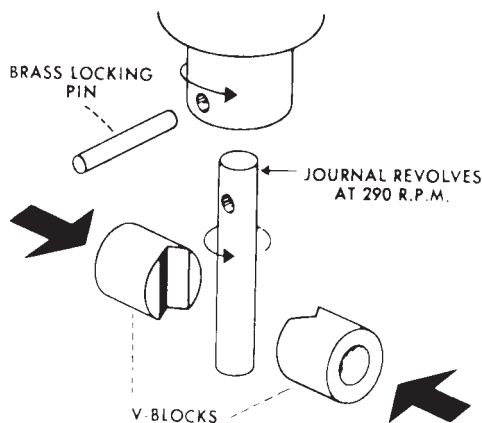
Exploded View of V-Blocks and Journal Arrangement, Falex Pin and Vee Block Test Machines
